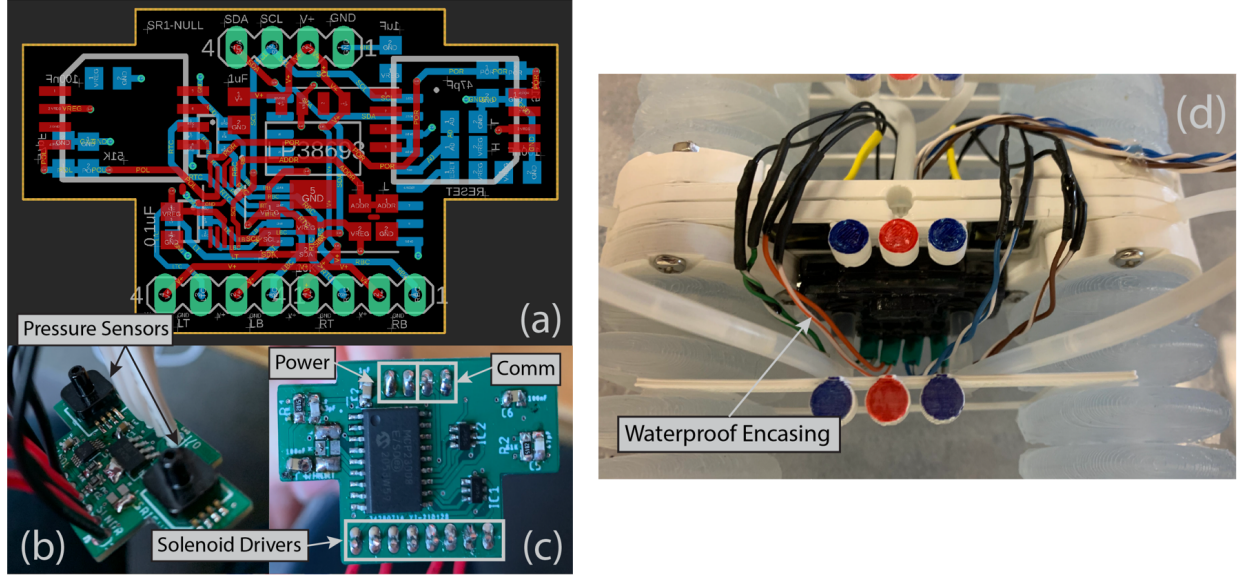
(a) Board design (b) Top of the board showing pressure sensors (c) Bottom of board showing solenoid driver outputs, power, and I2C communication connections (d) Board in waterproof enclosure installed on robot.
